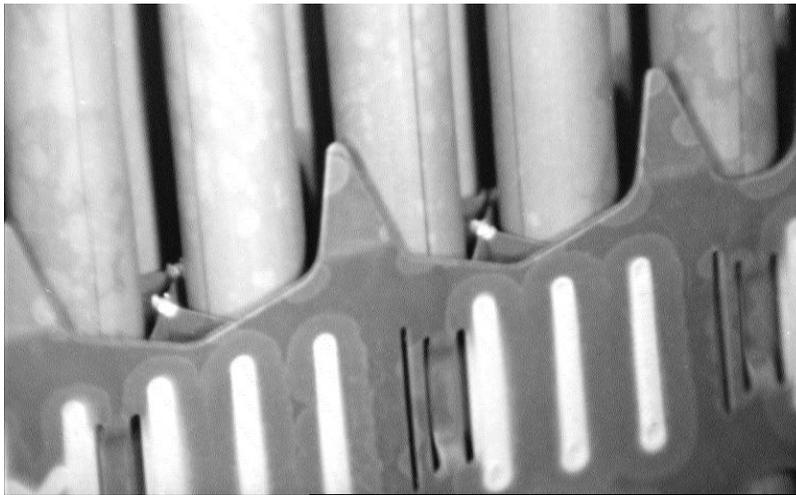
Condition of Zr1%Nb grid 14 weld joints, WLTA AA03-03, face 1, inspection 2010.
